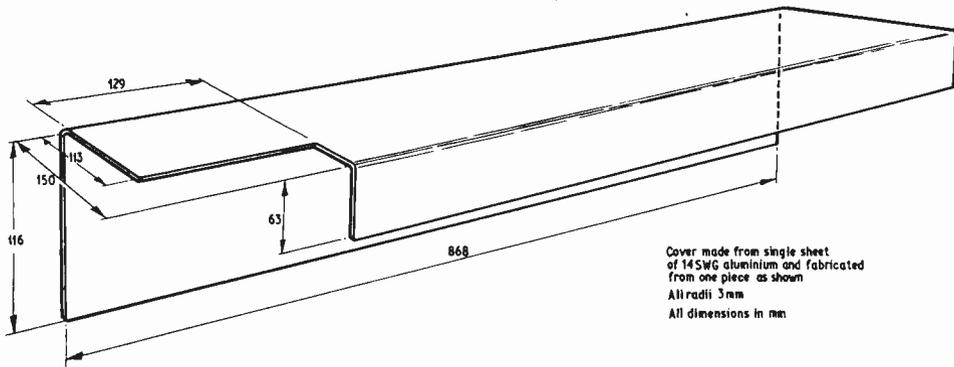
Prototype bending and cutting detail of keyboard cover plate
